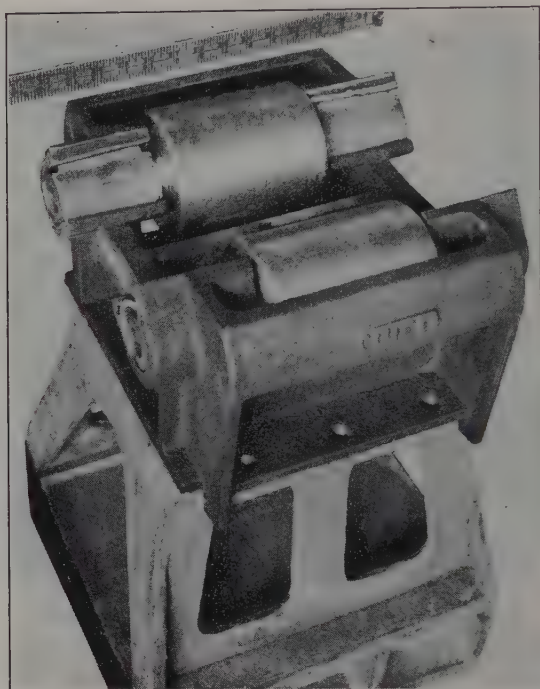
Alloy roller supports for shafts of Fig. 240.
